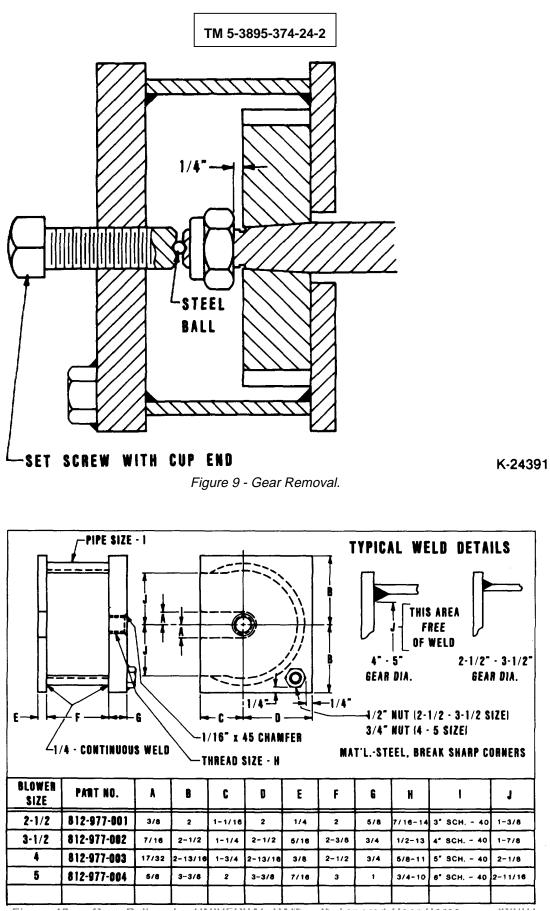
Gear Pullers for UNIVERSAL RAI® with Tapered Gear Bores.
